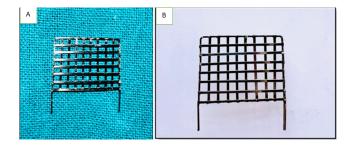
A: After welding of wire; B: After welding of wire.
